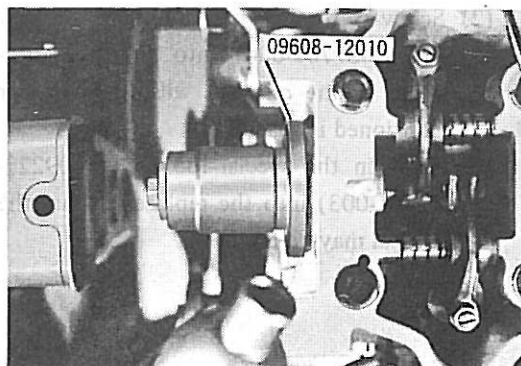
Press-Fitting Camshaft Oil Seal
